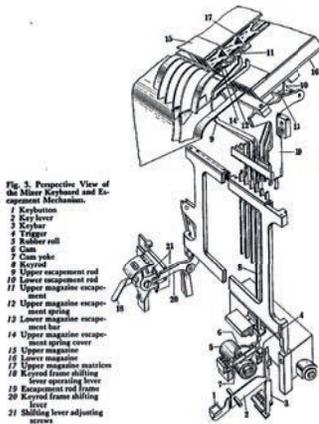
Perspective View of the Miter Keyboard and Escapement Mechanism.
